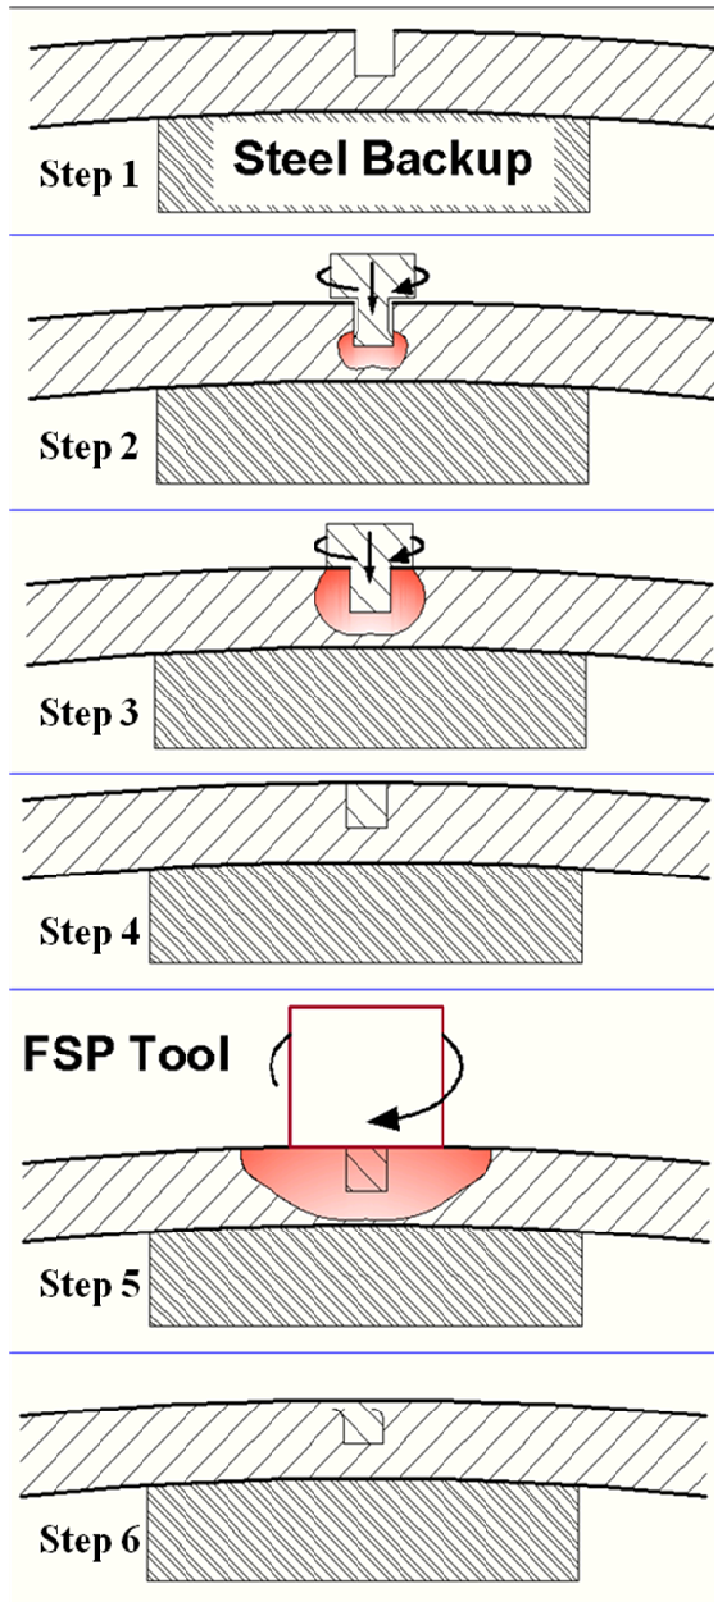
Steps of repair by squashing a rotating plug inside a hole followed by FSP using flat tool.
